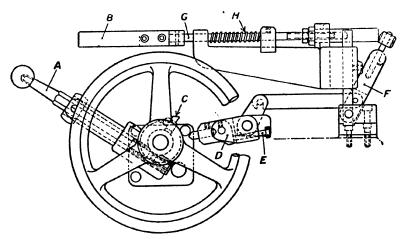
AUTOMATIC WORK EJECTOR MECHANISM EMPLOYED ON SCRIVENER MACHINES
